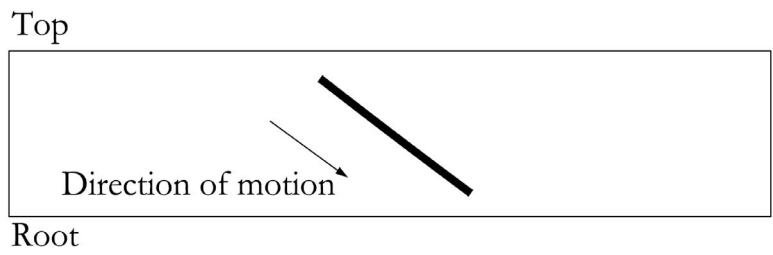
Path of contact on the gear tooth surface for helical gears with crossed axes.
